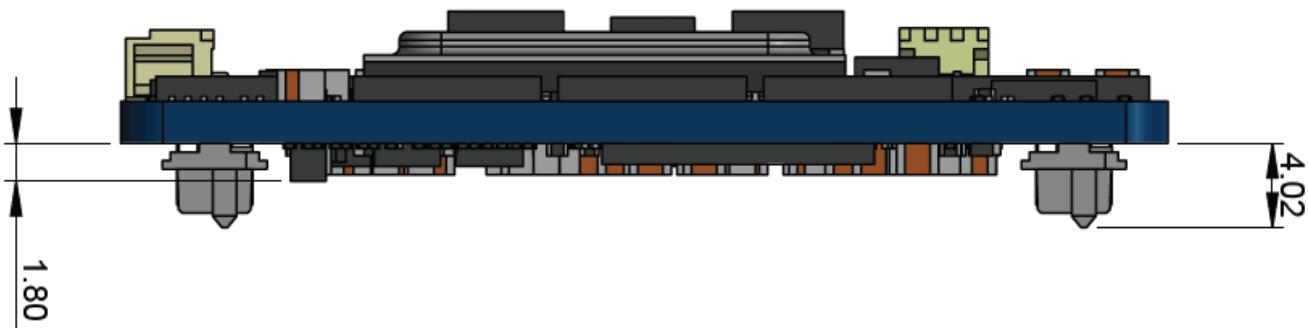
Mechanical dimension of Zynq UltraScale+ MPSoC SOM – Bottom Max. Heighted Component
